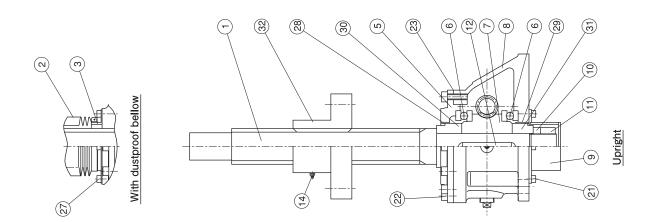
Traveling Nut Type Screw Jack (JGA, J4A~J7A)
